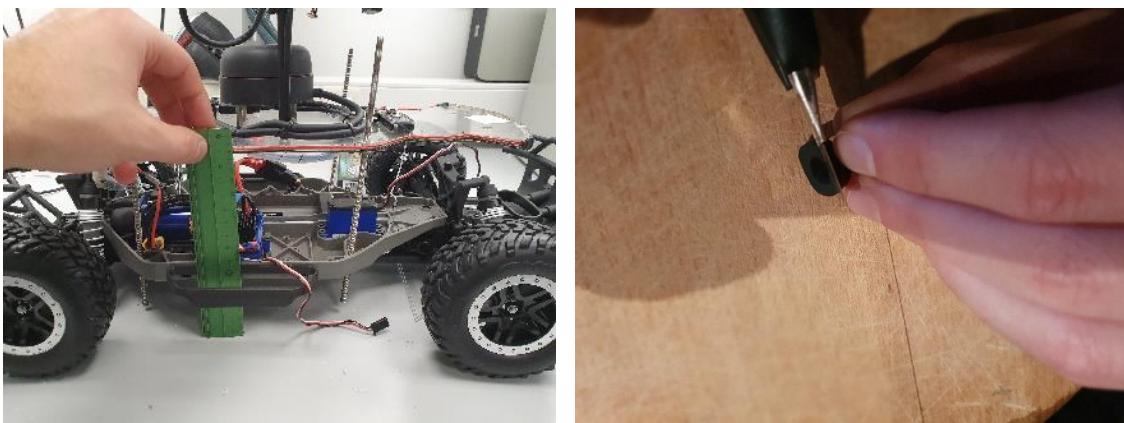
Final adjusting of the iron rods position (left) and level rubber preparation (right)
